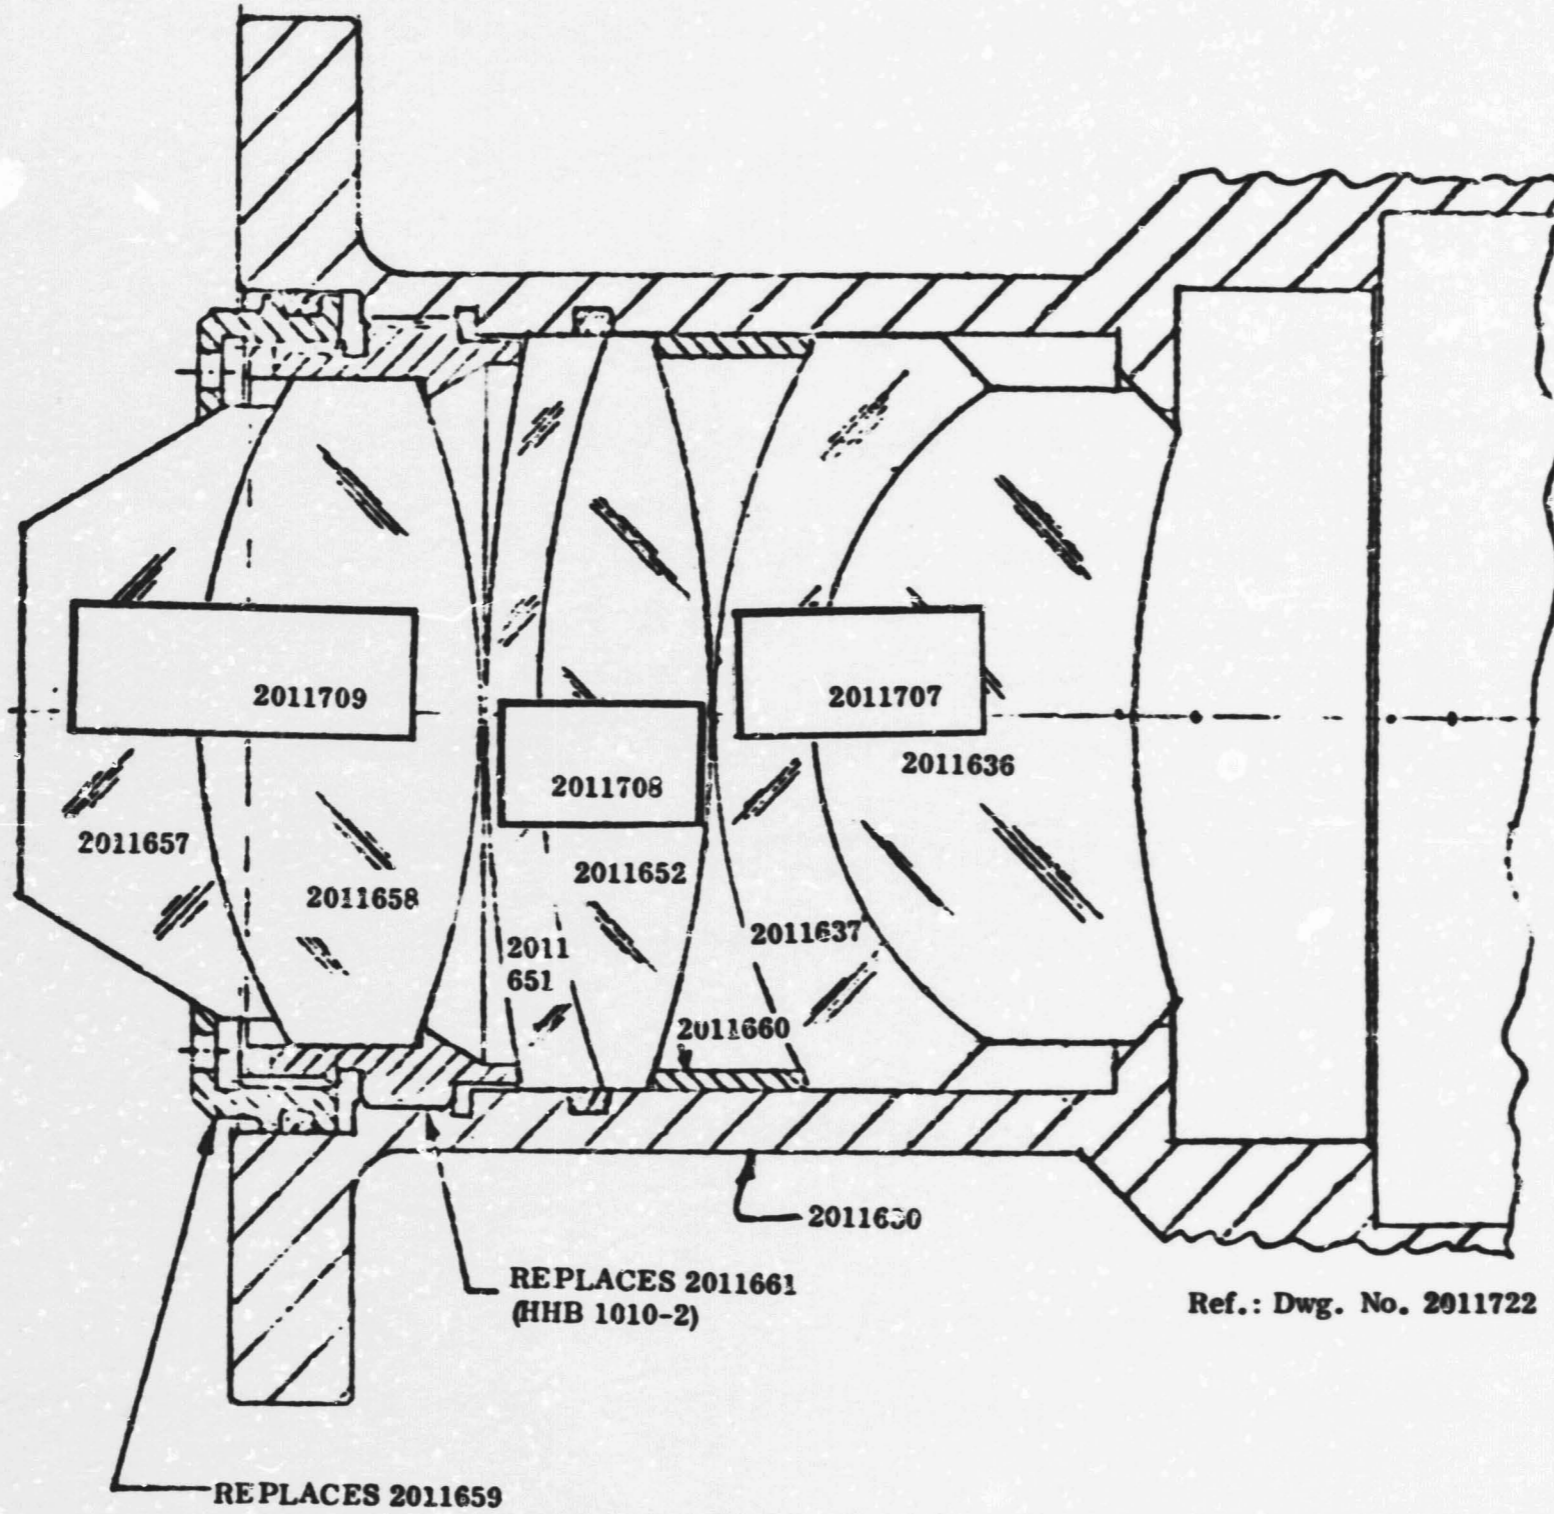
Adjustable Reticle Assembly - SCT (Sheet 3 of 3)
